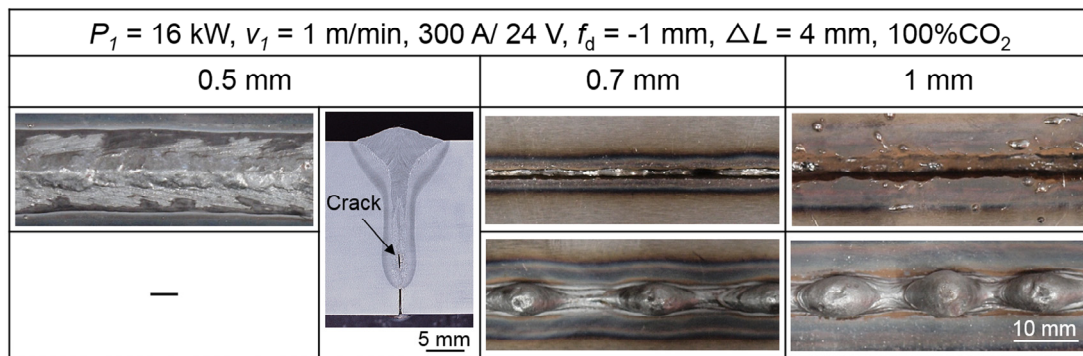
Surface appearances of weld beads produced by laser-CO₂ arc hybrid welding at various gaps.
